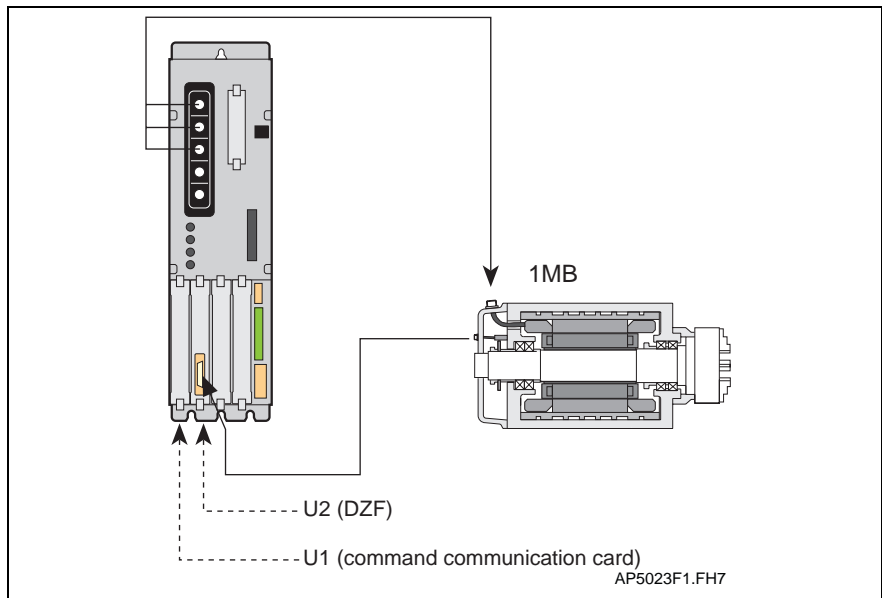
1MB motor with gear wheel encoder with 1Vpp signals on a DZF03.1M plug-in module
